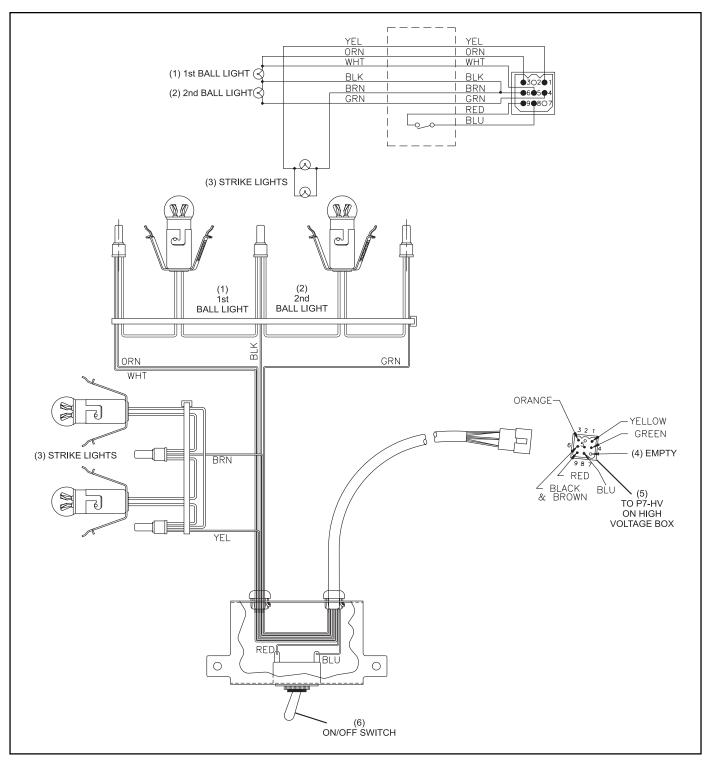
Masking Unit Cable Assembly (Part No. 53-200871-000)
